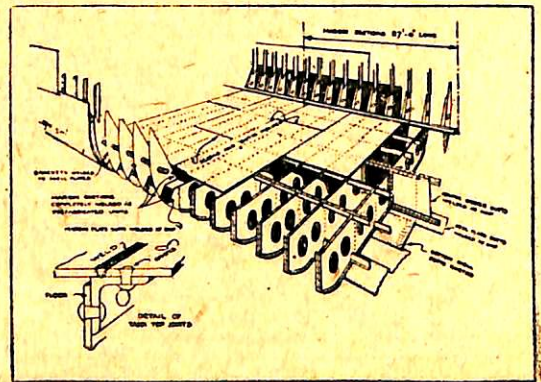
The hull bottom construction of a partially fabricated 10,000-ton standard cargo steamship
